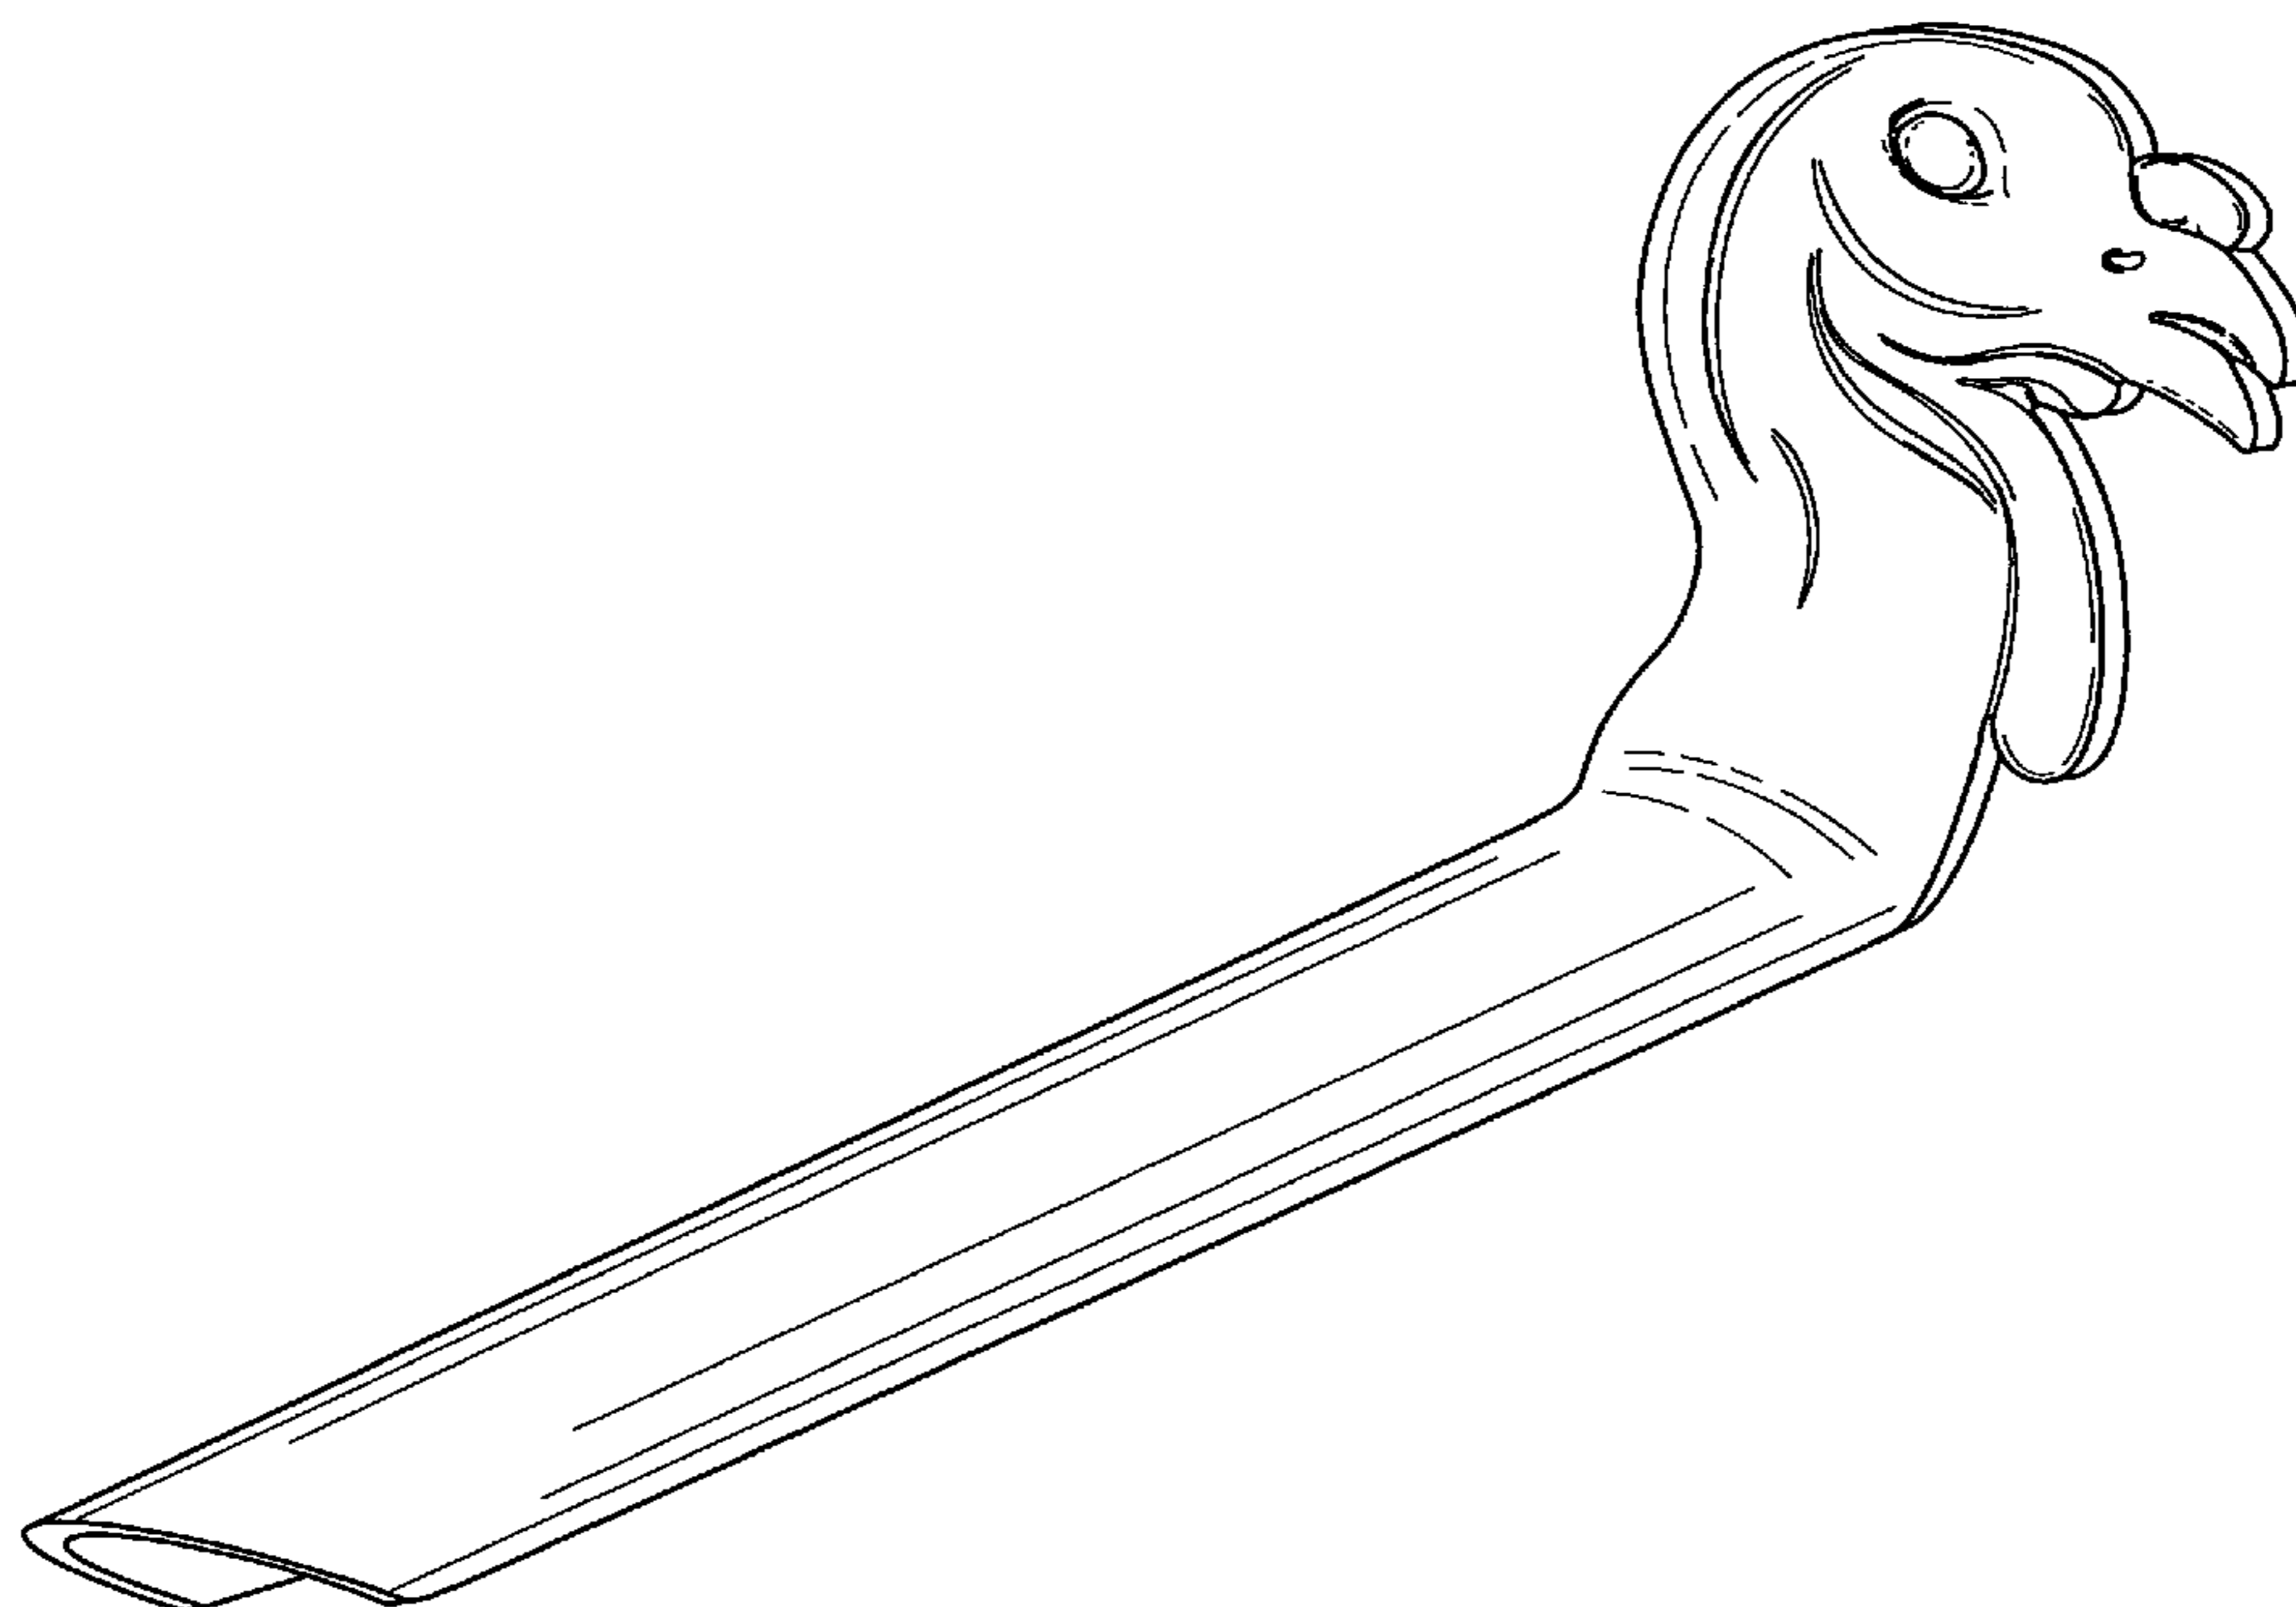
is a right side elevational view of the cooking rod of FIG. 1,
